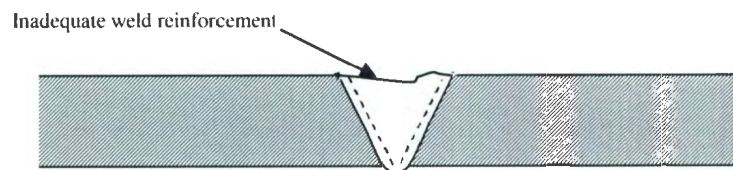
Inadequate weld reinforcement in a welding joint
